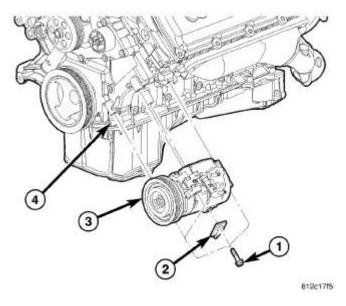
A/C COMPRESSOR REMOVAL/INSTALLATION Courtesy of CHRYSLER LLC
